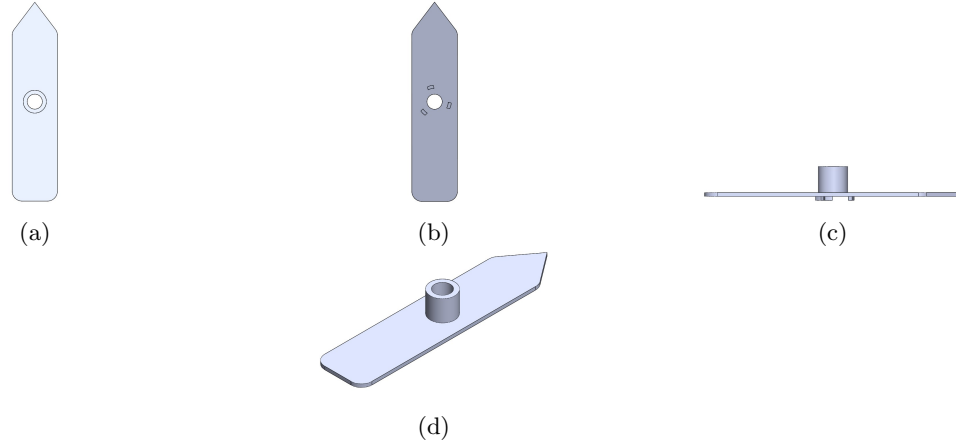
Guiding arrow: (a) top view (b) bottom view (c) side view (d) isometric view.
